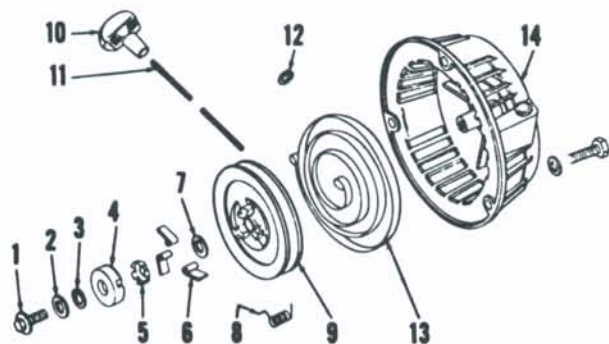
Exploded view of recoil starter used on Kohler two cycle engines.
